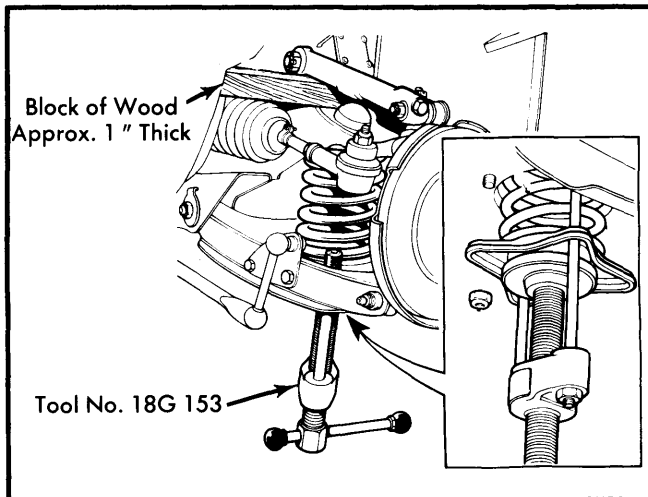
Where to Place Tool When Compressing Front Spring for Removal
